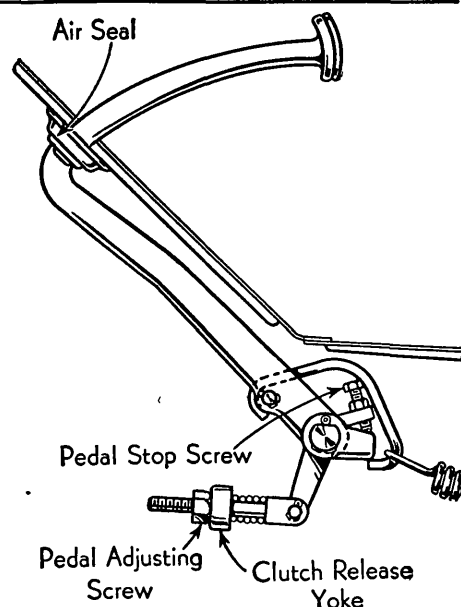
Clutch pedal adjustment. 1935-38 Series 60, 80, 90
